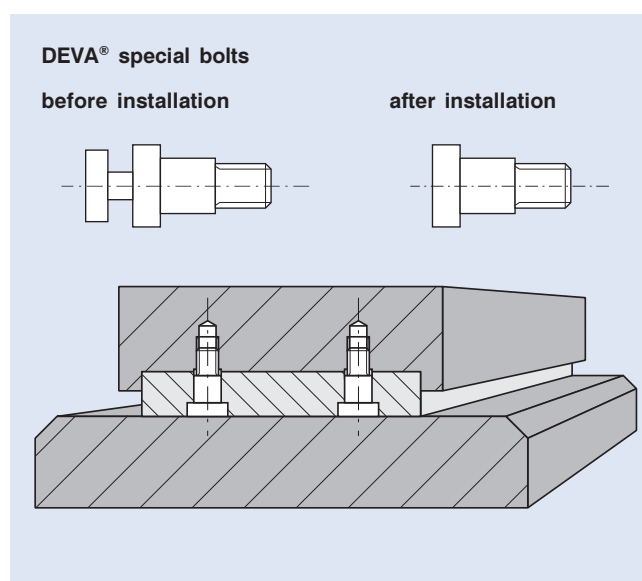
Installation of a deva.metal® sliding plate with DEVA® special bolts
